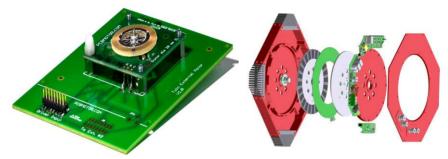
(a) Embedded Cooling System PCB (b) Exploded view of Embedded Cooling System PCB
